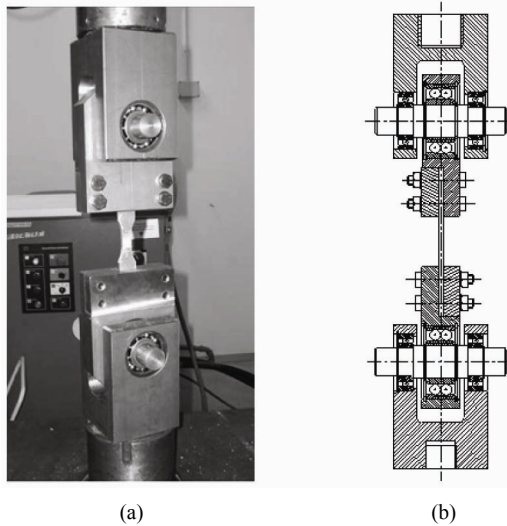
Fatigue testing system: (a) picture of the clamping system; (b) assembly drawing.
